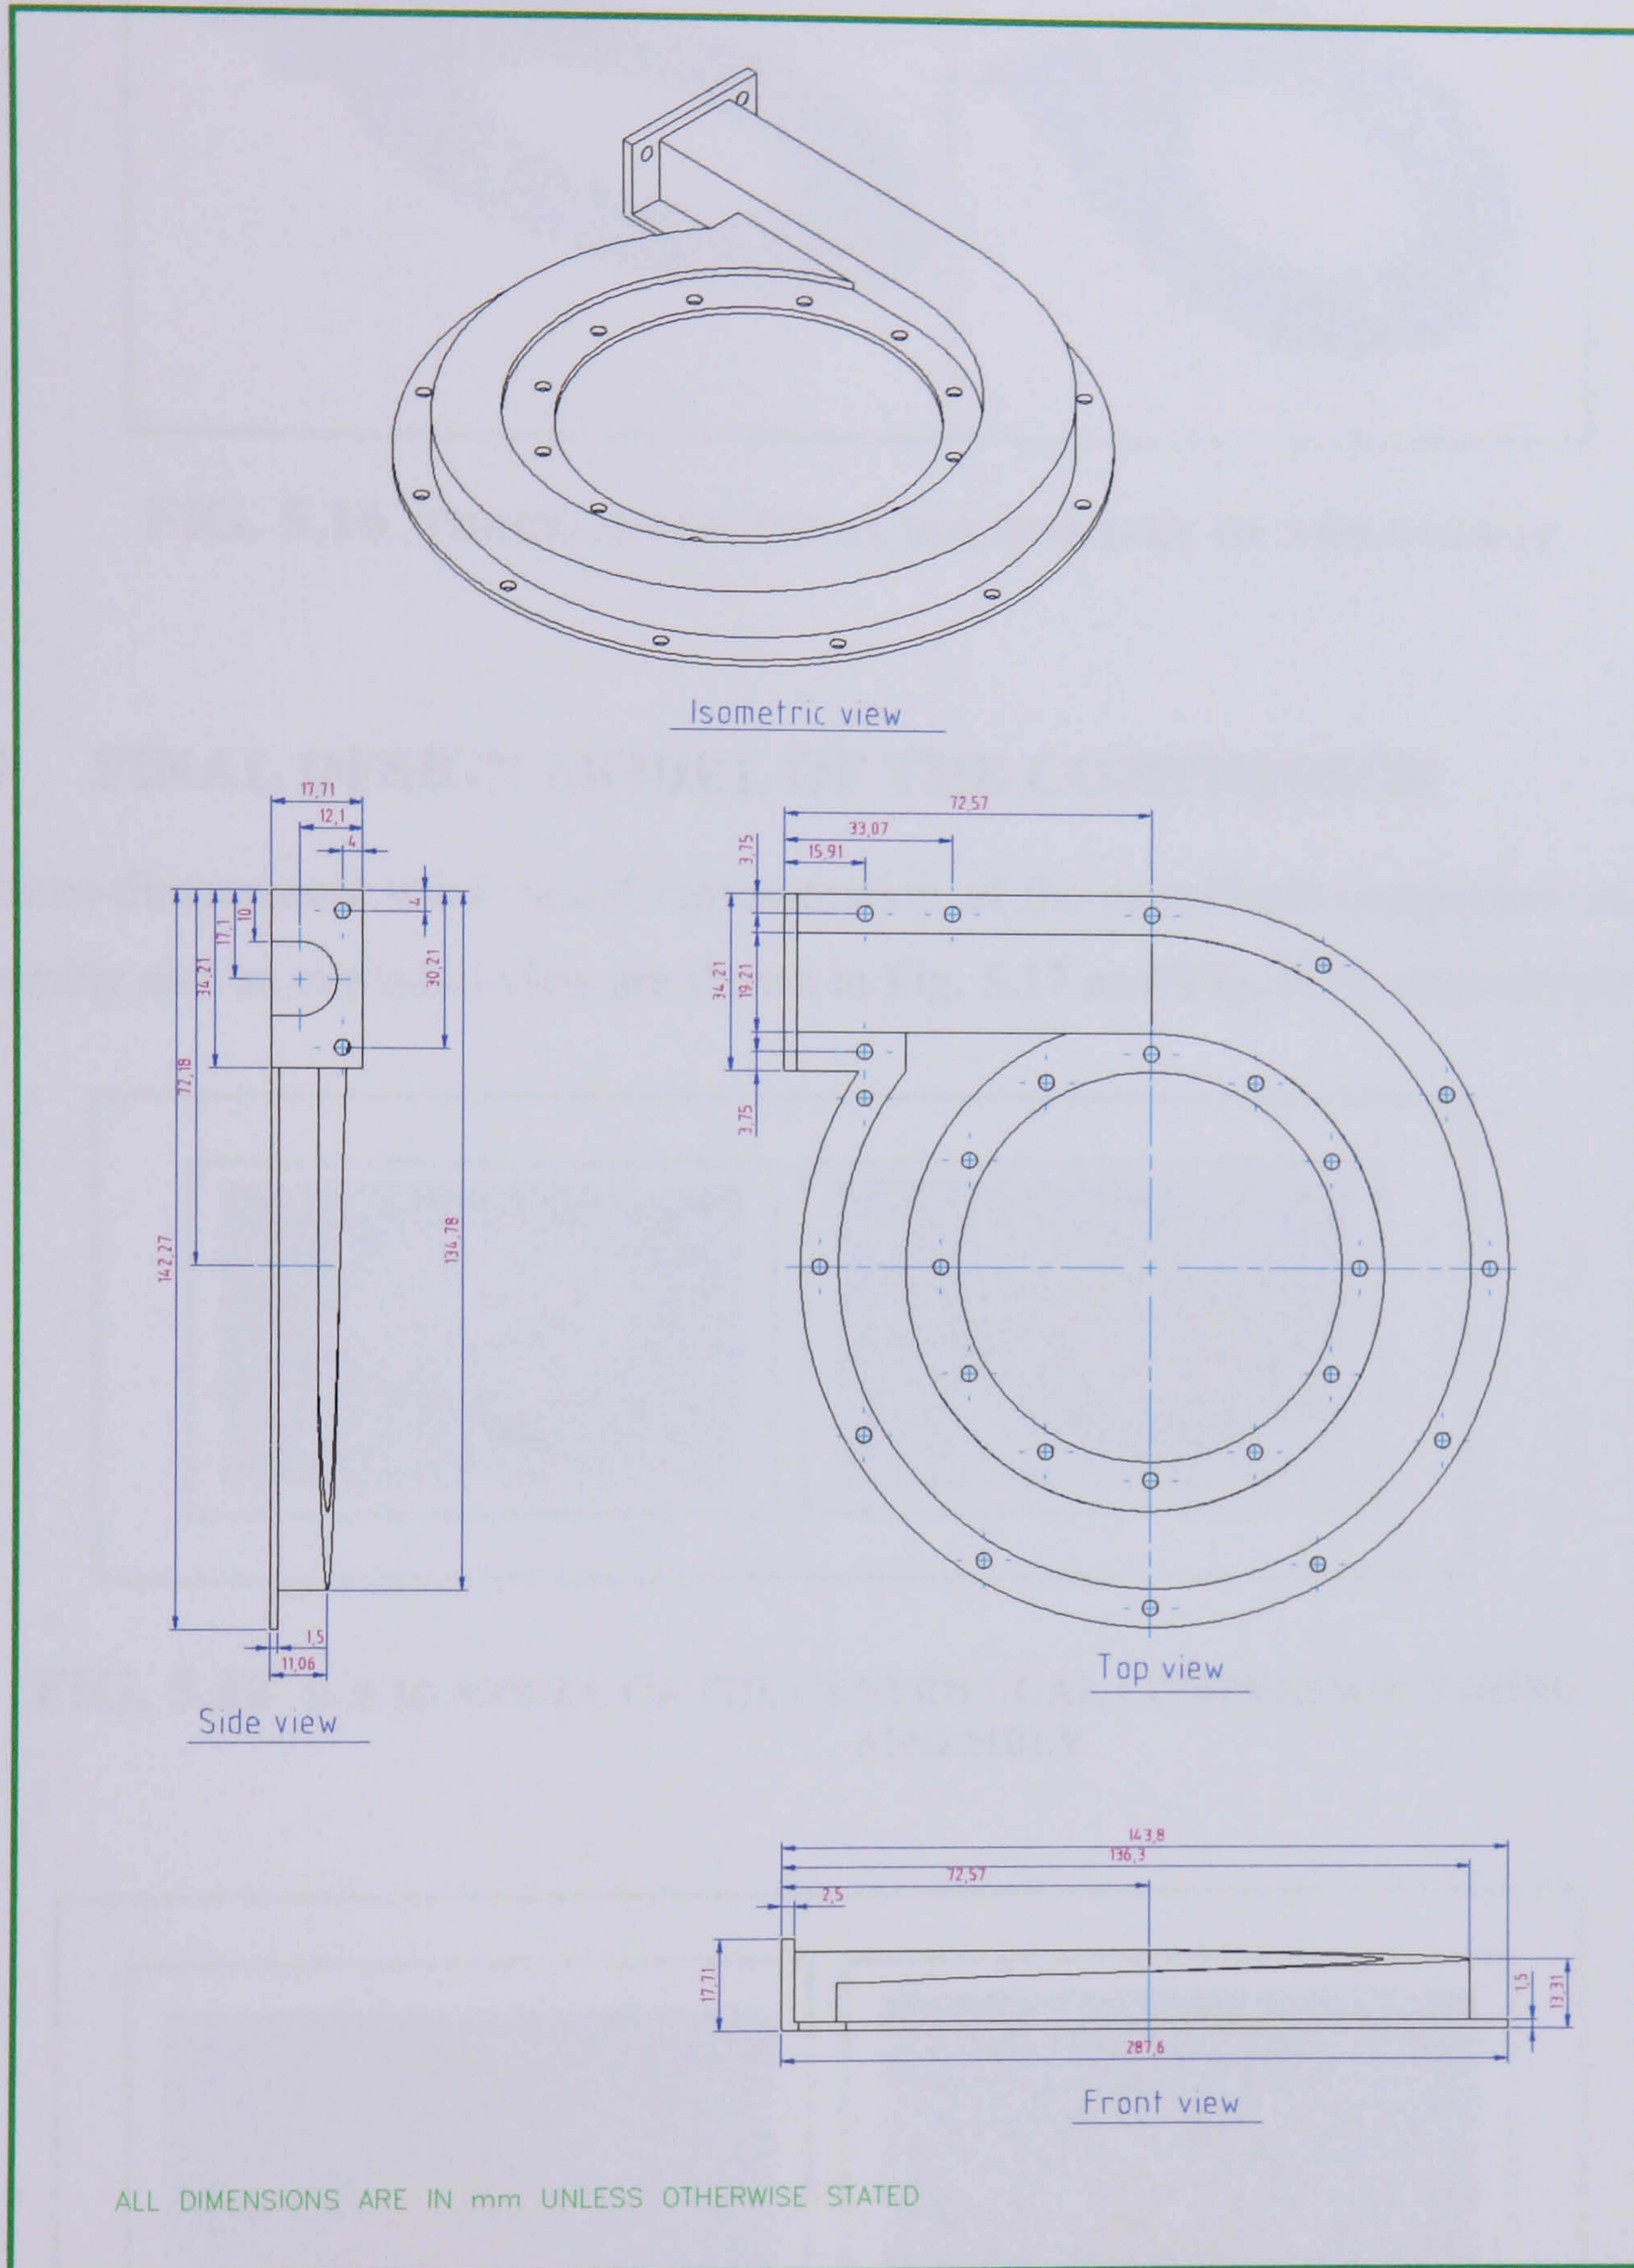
DETAIL DESIGN DRAWING OF THE VOLUTE
